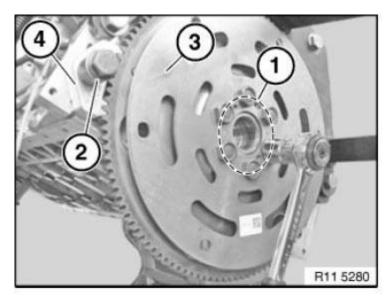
Installing Flywheel Using Special Tool (11 9 260) Courtesy of BMW OF NORTH AMERICA, INC.
